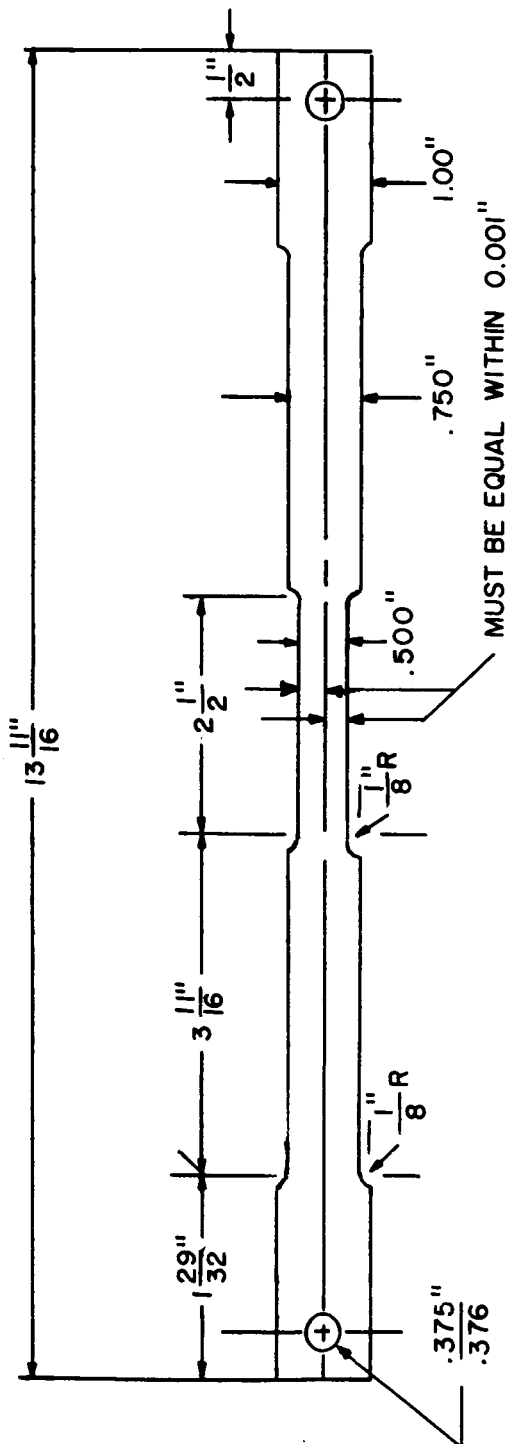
CREEP SPECIMEN USED FOR SHEET STOCK
